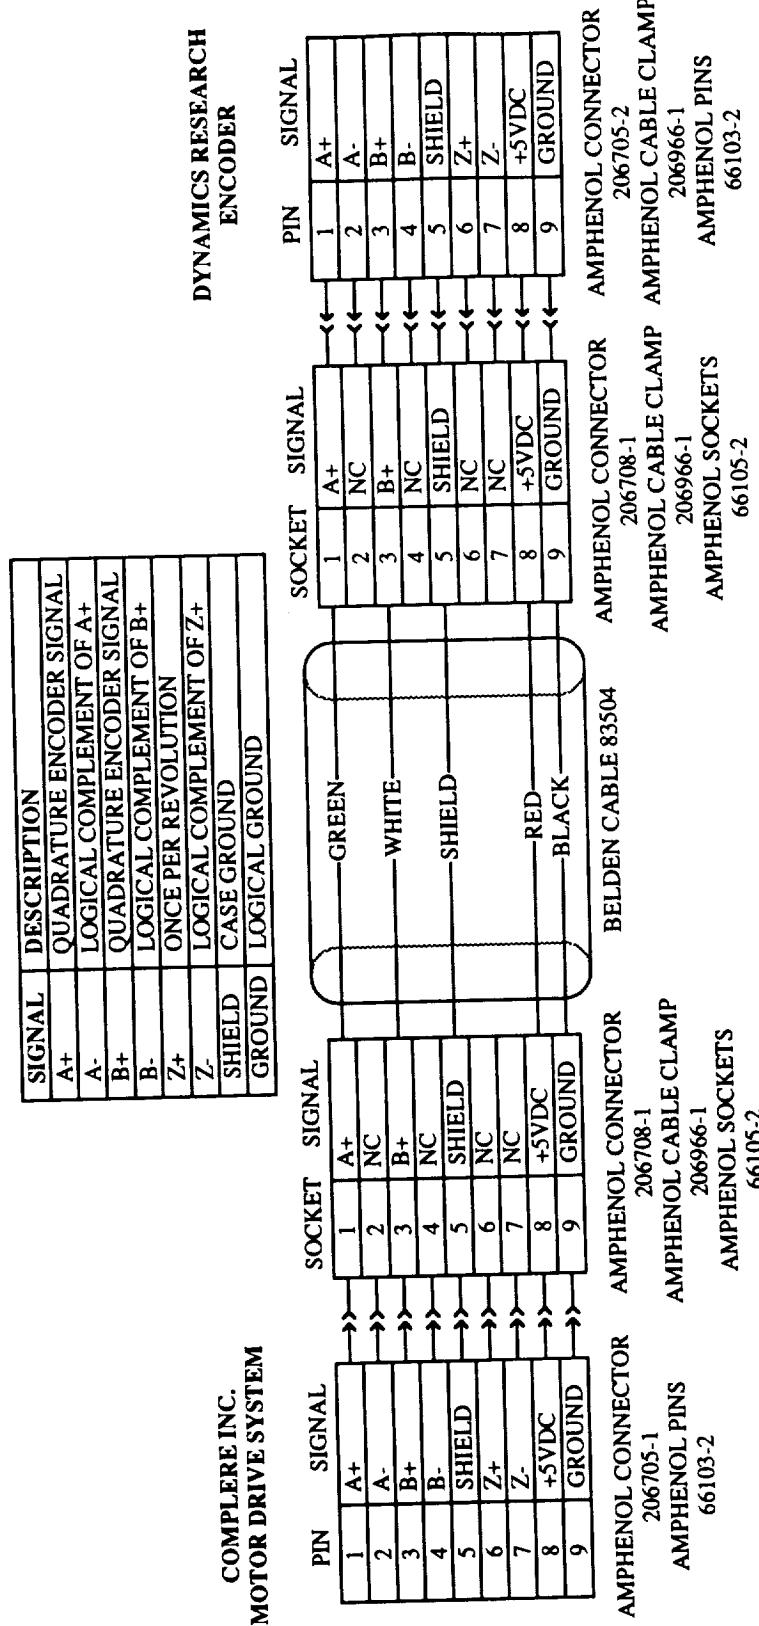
Motor Drive System to Dynamics Research Encoder Cable.
